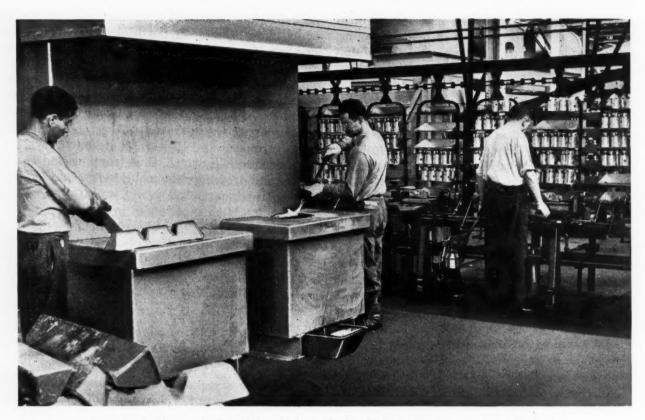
A View of the Side of One of the Melting Furnaces. The Man at the Left is Charging Ingots into the Feeding Well, while the Man at the Right is Ladling Molten Metal from One of the Dipping Wells. A Line of Casting Machines and One of the Conveyors May be Seen in the Background
